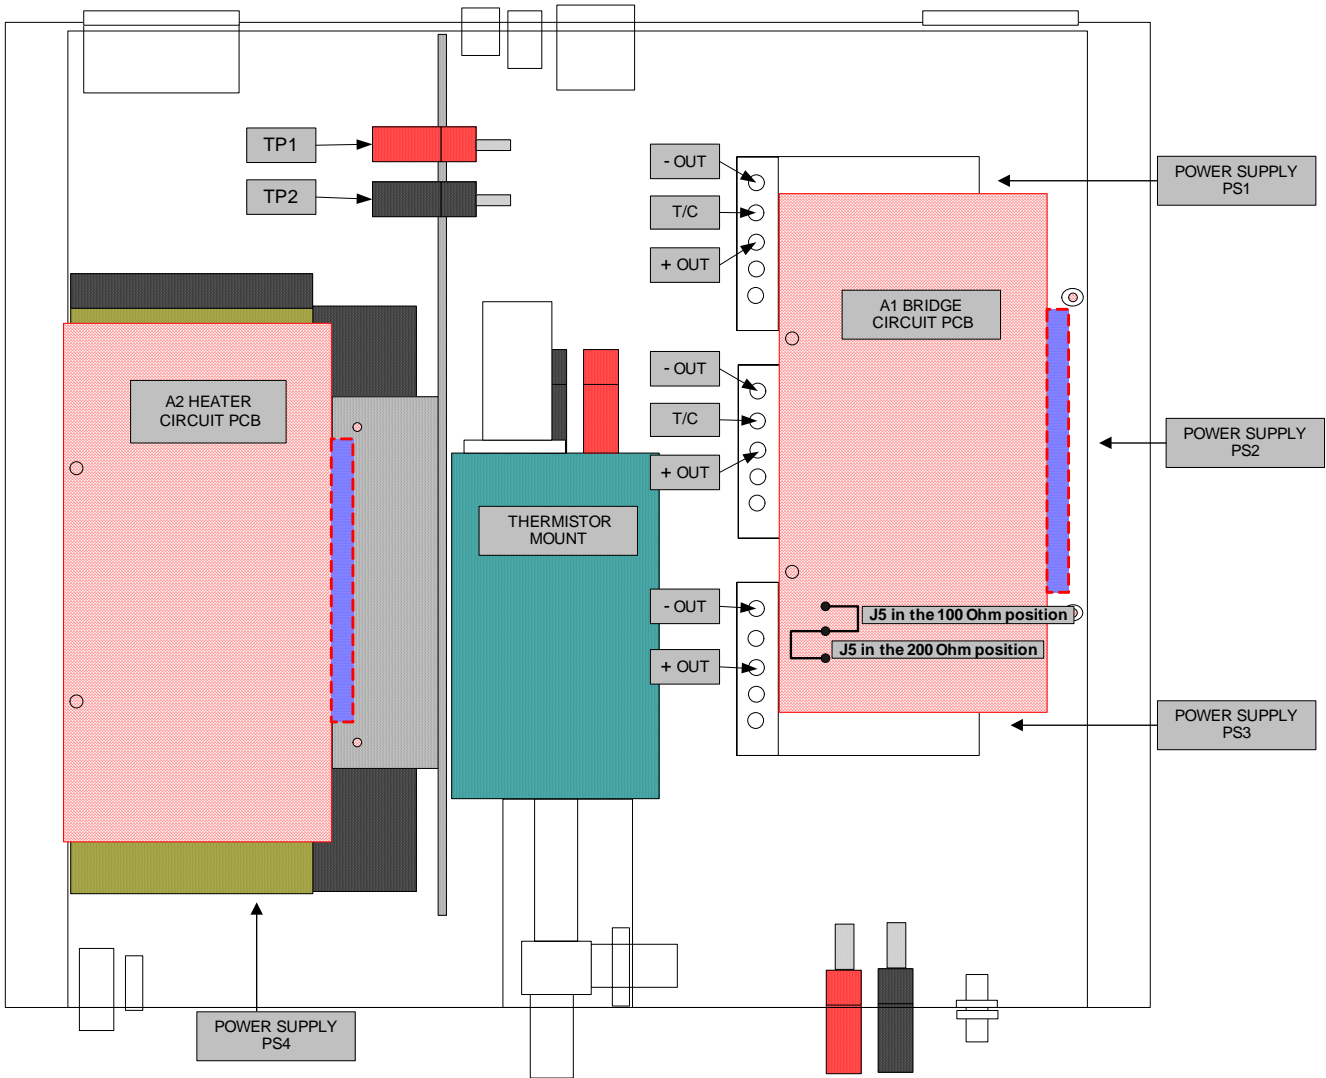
Top View layout of Model 1825/1827 subassemblies
